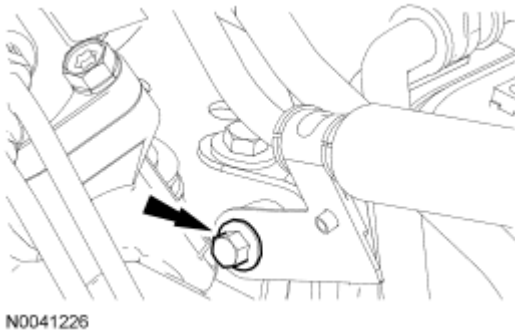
Locating Power Steering Pressure (PSP) Hose Bracket Bolt
